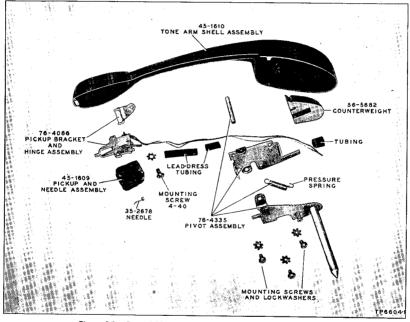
Record-Player Tone-Arm Assembly, Part No. 35-2686
